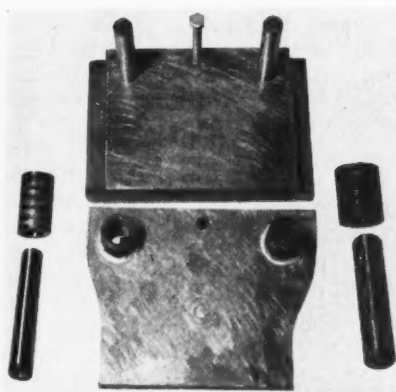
Showing a Westinghouse die set in which the bushings are held in place with matrix alloy.
